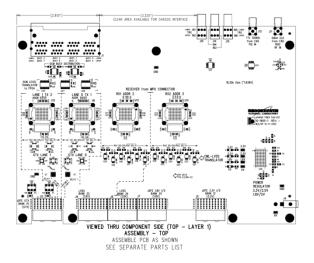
The layout of the GL1/GTM add-on board. The board has been sent out for fabrication.
